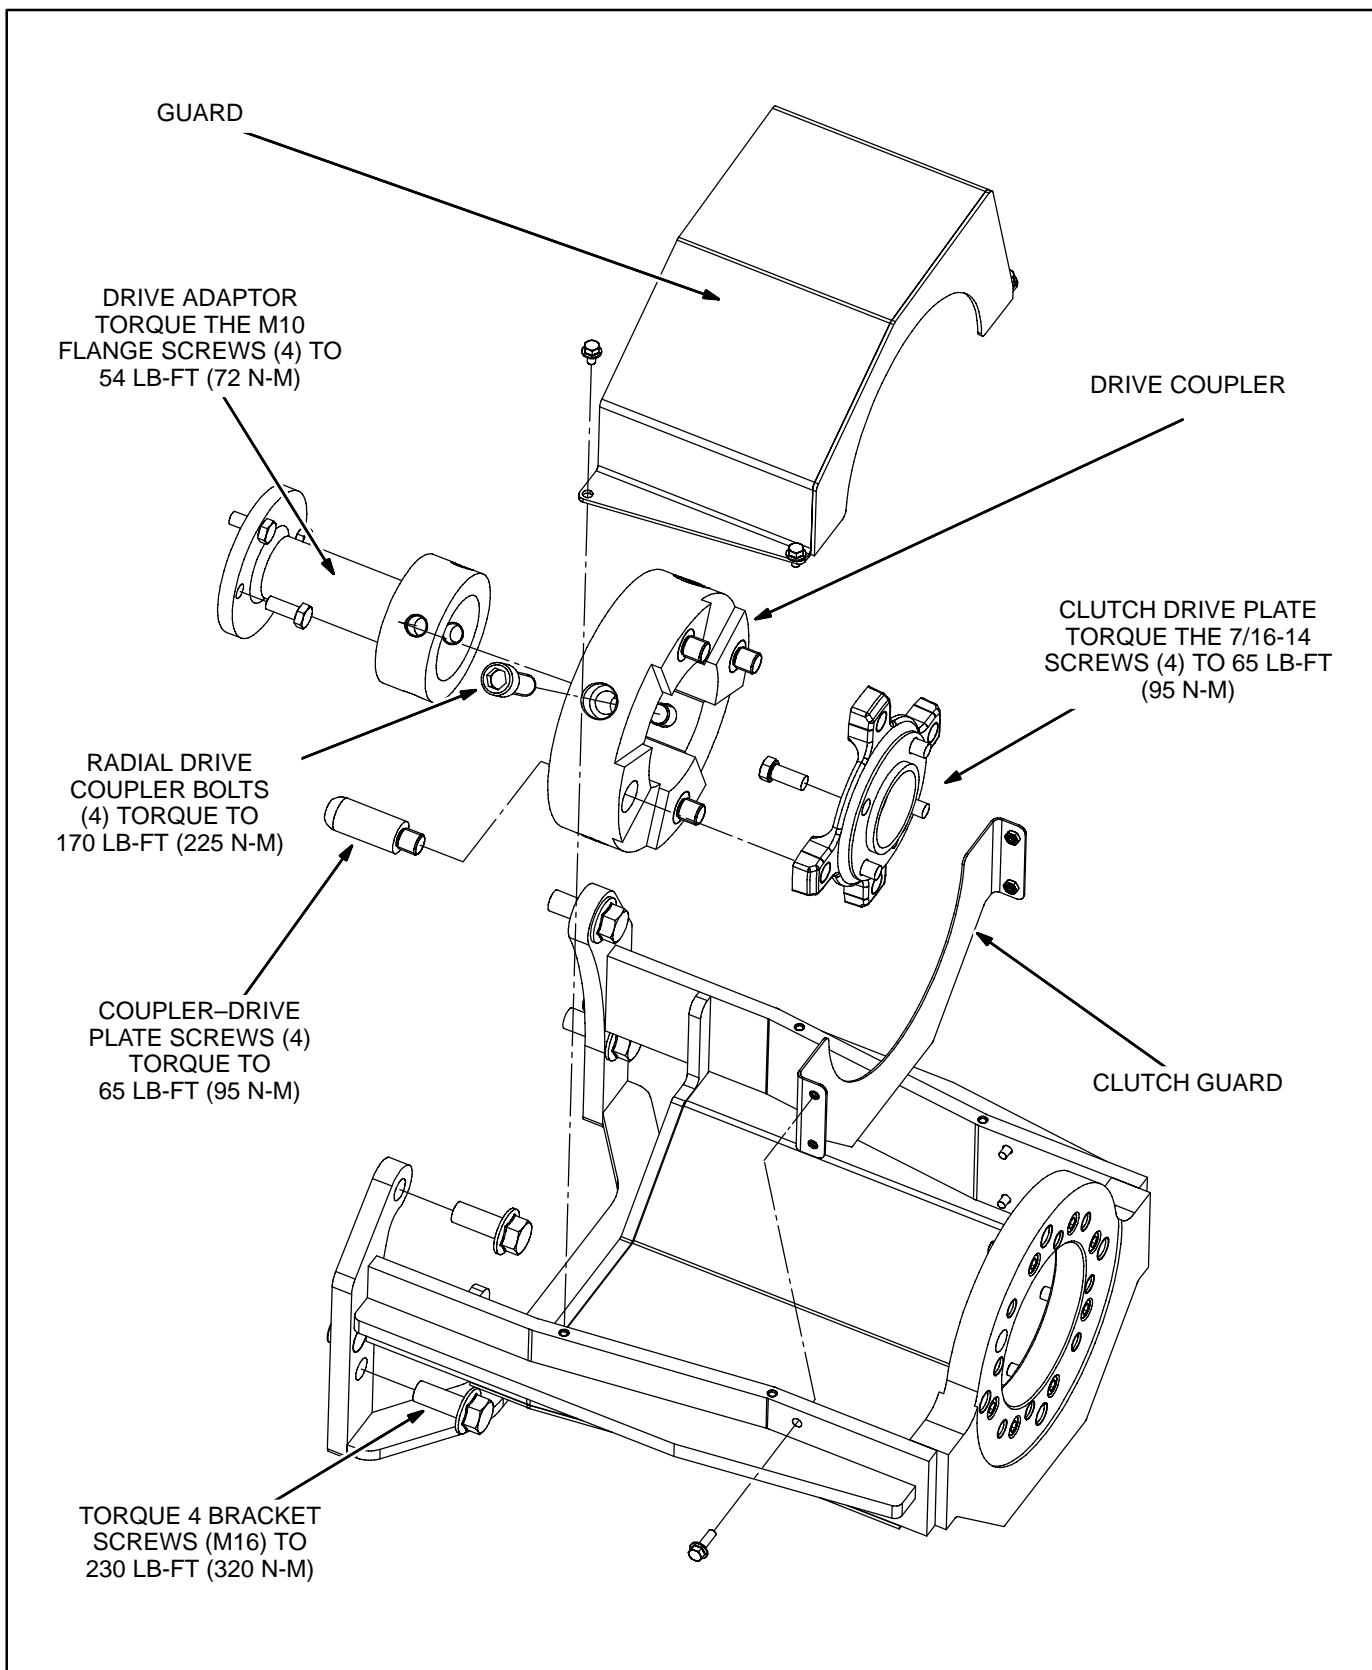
PTO BRACKET, DRIVE ADAPTER AND COUPLER
